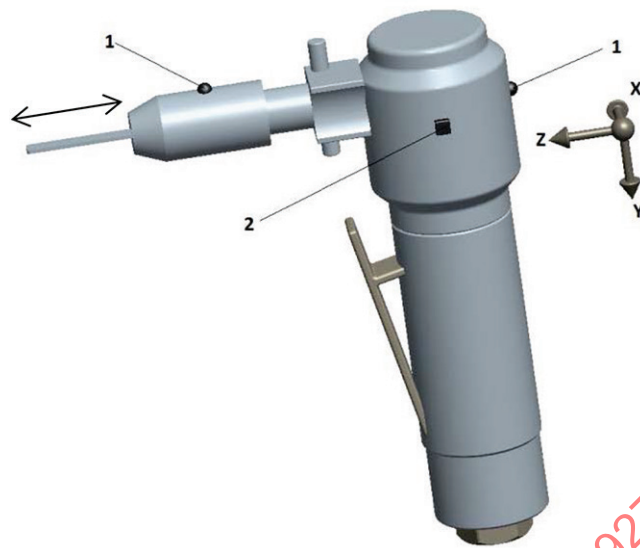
Measurement locations — Angle polishing/filing machine with reciprocating action — Designed for single hand held operation
